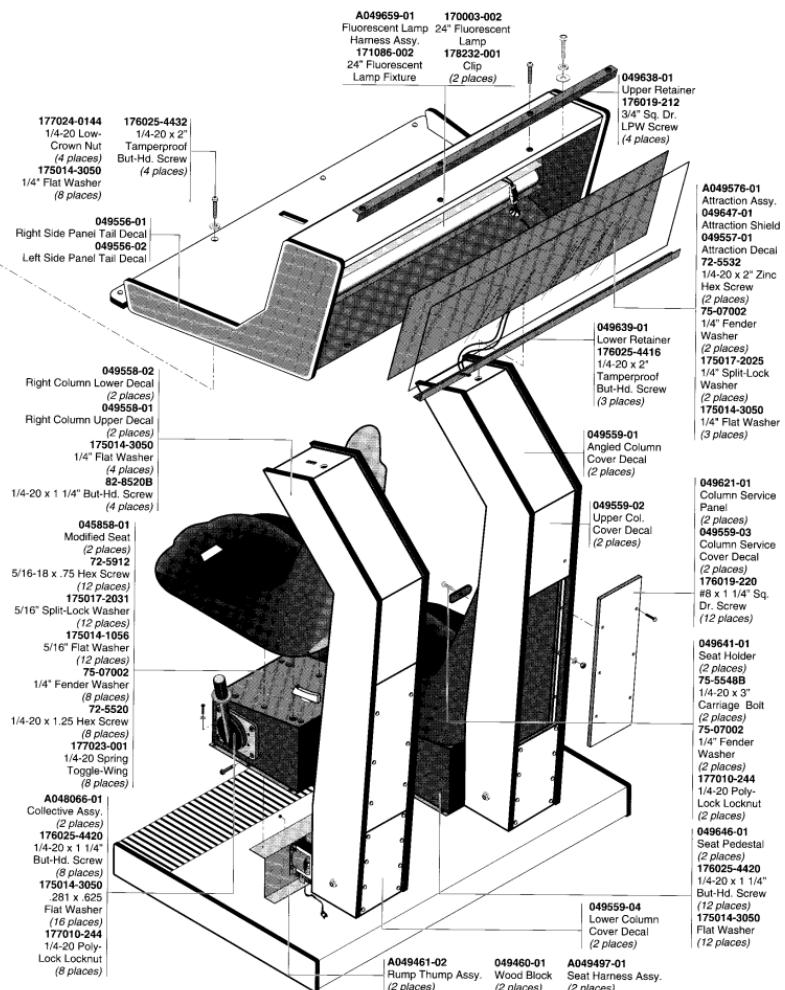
Cabinet-Mounted Assemblies, Front View, Continued
